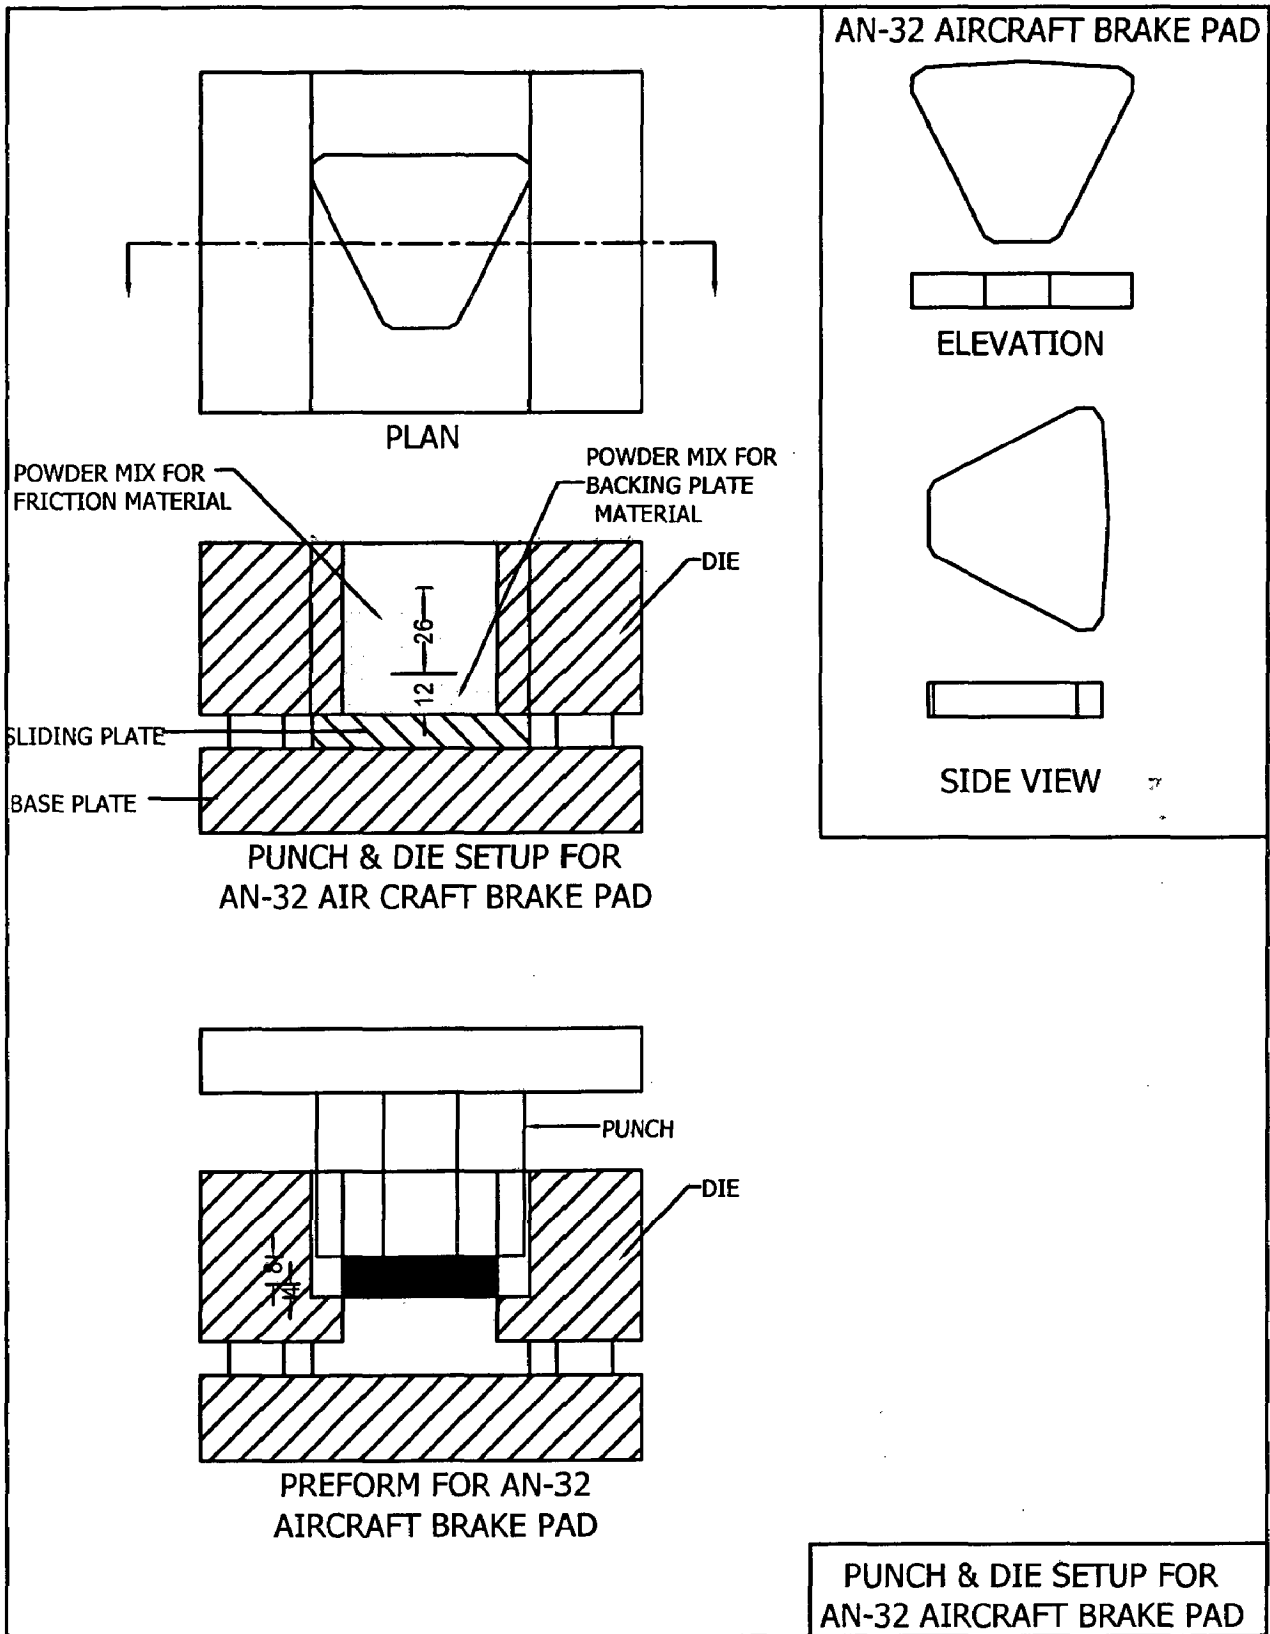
Punch & die setup for AN-32 aircraft brake pad
